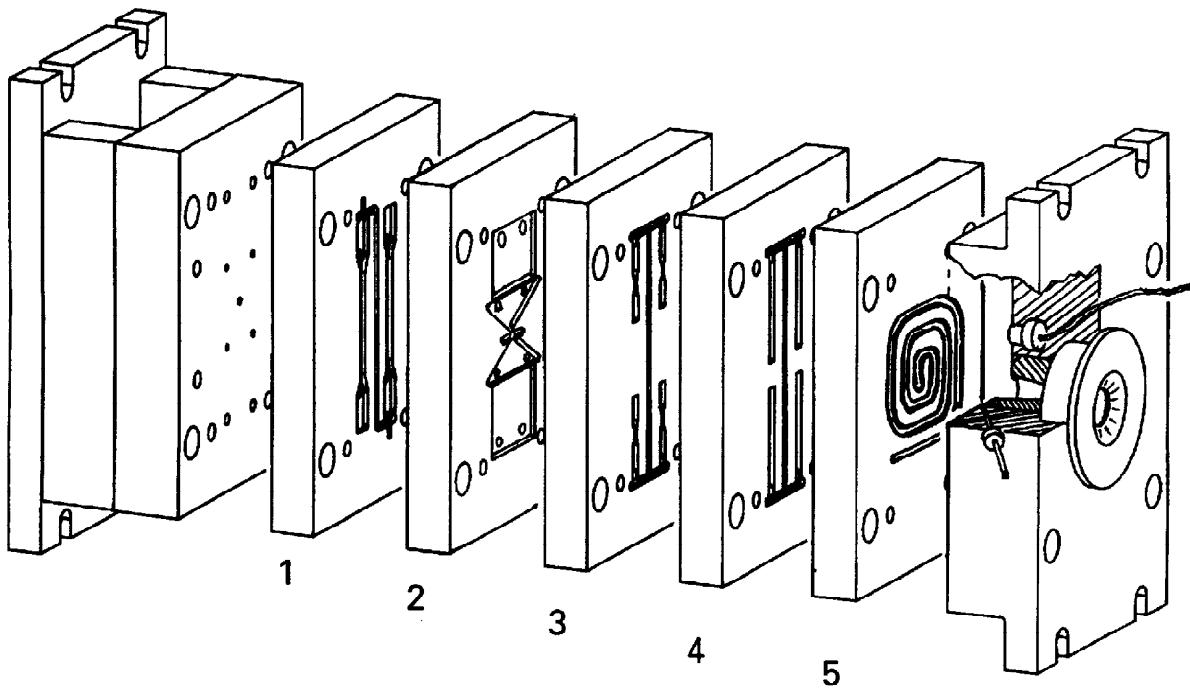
Exploded view of an injection mould with interchangeable cavity plates
